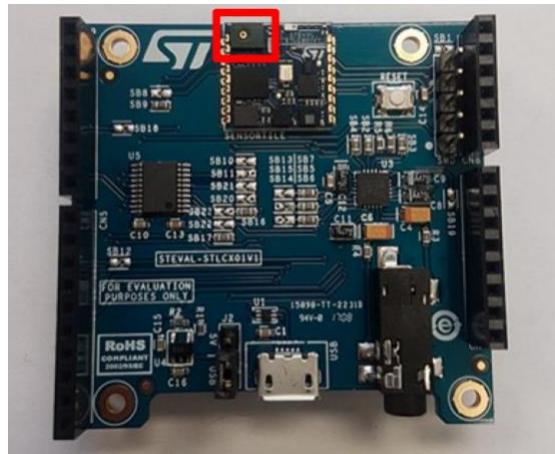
Ensure the orientation of the SensorTile on the larger Cradle board matches this figure.
